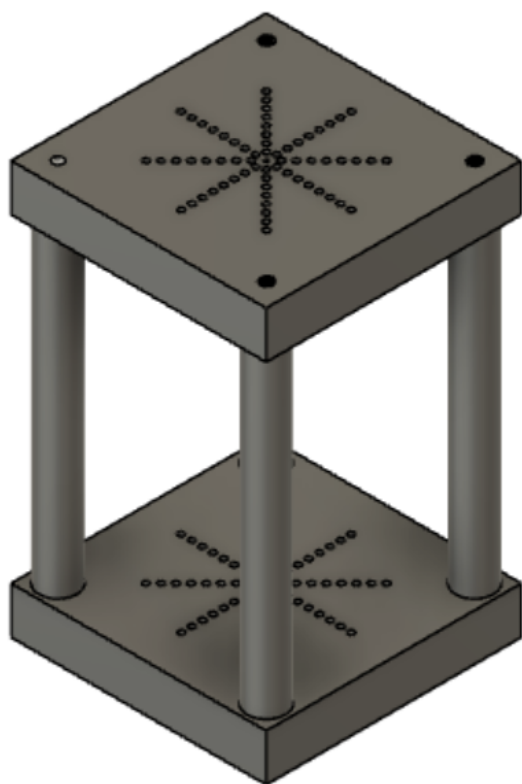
"Chess-piece" design of dynamically-rotating shield.
